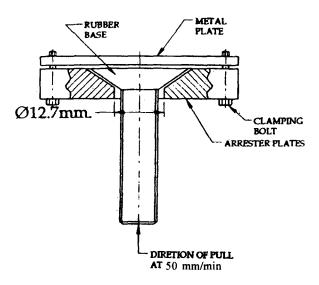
Schematic Arrangement for Valve Pull-Out Test
